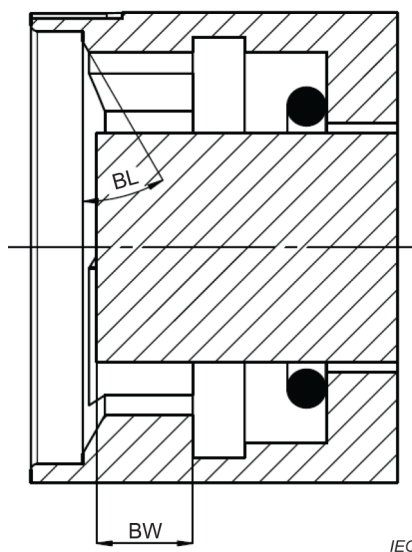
Side view of the female side of the push-pull housing for C-coding
